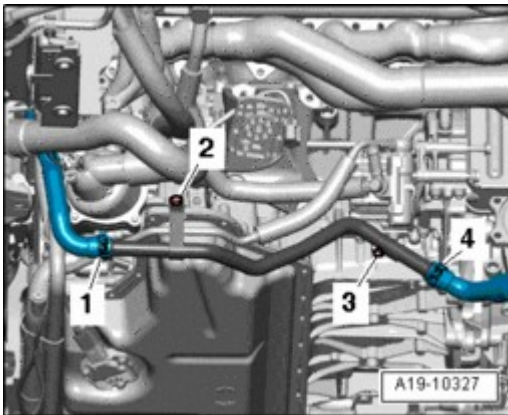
Removing Nut And Bolt On Lower Left Coolant Pipe
